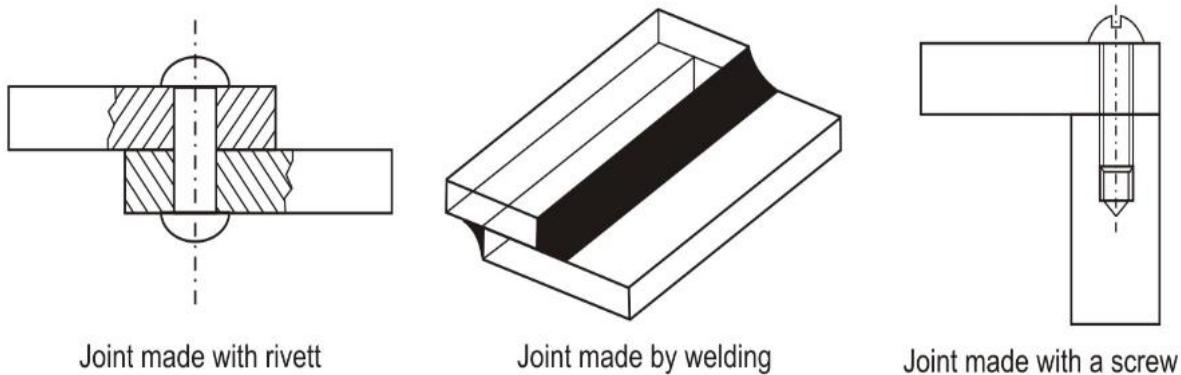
Various joining methods (a) Riveting (b) Welding (c) Fastening
